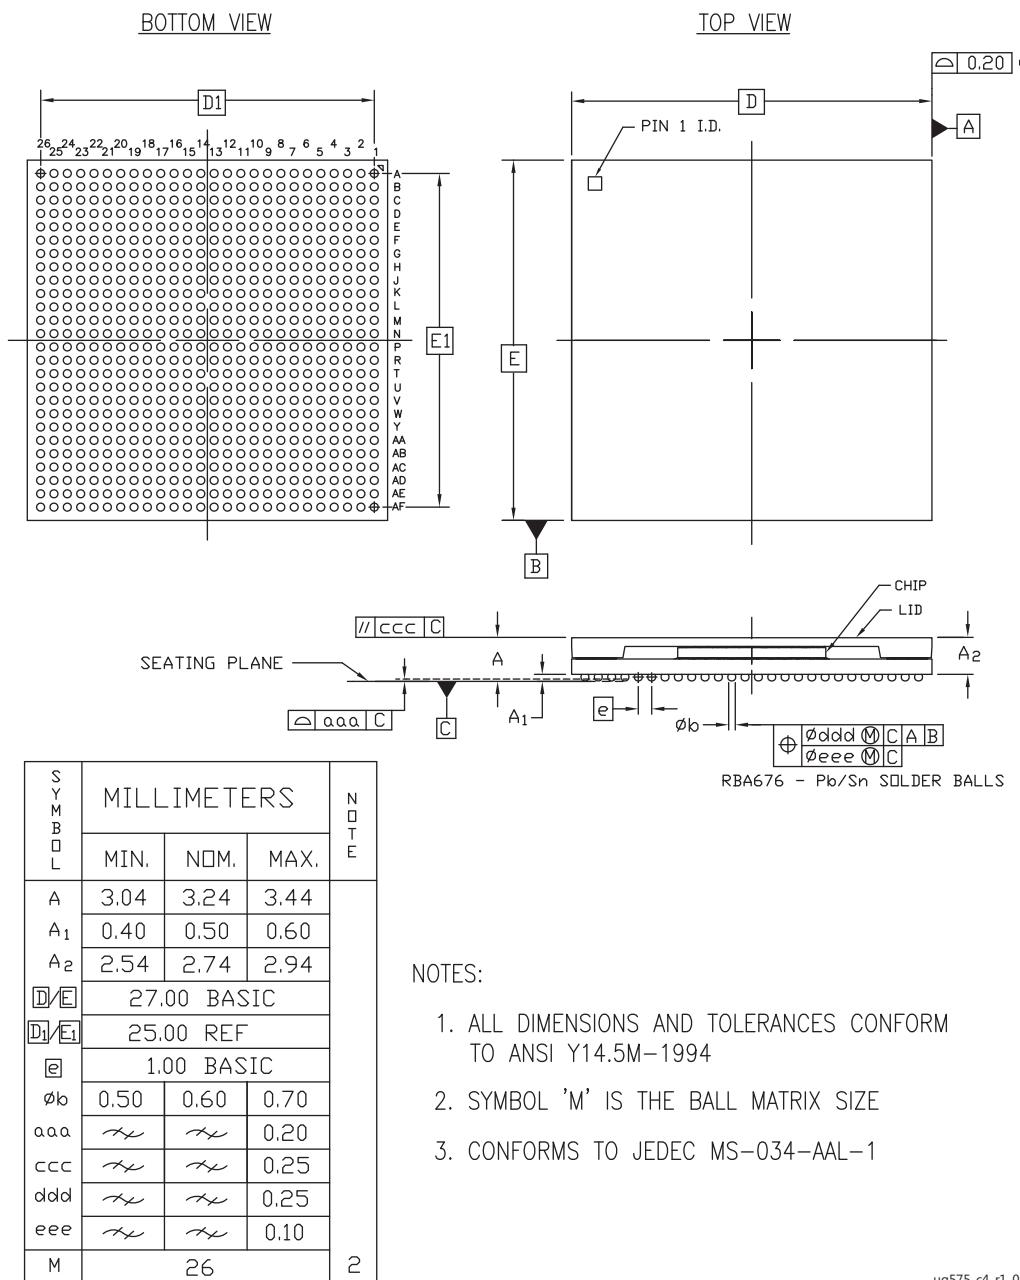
Package Dimensions for RBA676 (XQKU040)
